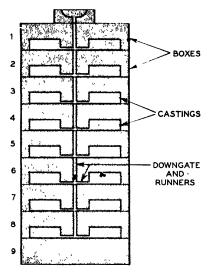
Stack moulding can simplify Strickle Moulding PRODUCTION IF EMPLOYED FOR SUITABLE TYPES OF WORK
